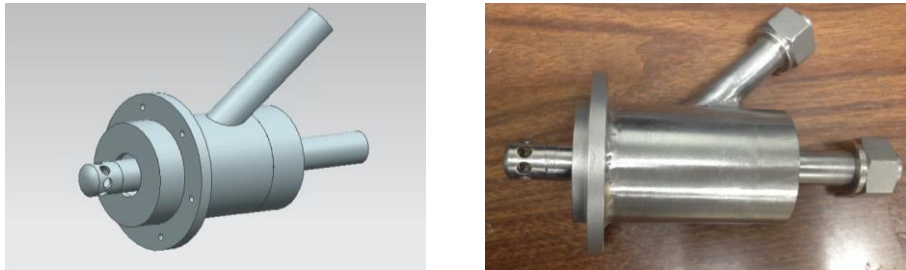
Pintle CAD model and actual fabricated pintle injector
